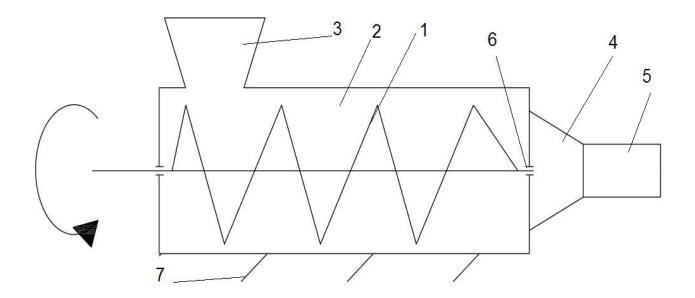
Kinematic scheme on extruder press for briquettes from tobacco residues: 1 - screw conveyor with variable pitch; 2 - body of extruder; 3 - hole for charge; 4 - pressure chamber; 5 - guide-way part; 6 - bearing; 7 - mainstay
